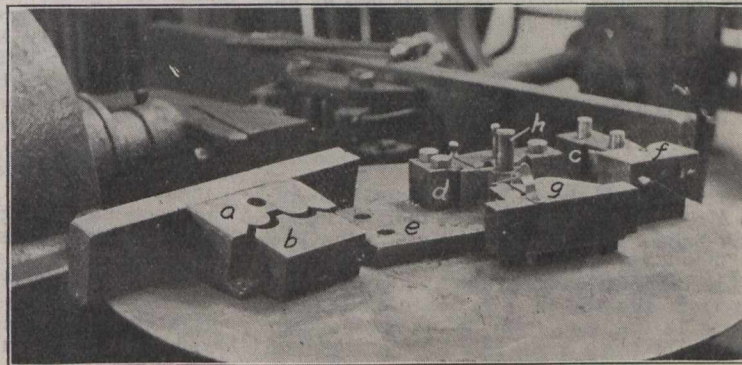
Dies for Forming Inner and Bottom Members of Superheater Tube Clips.
